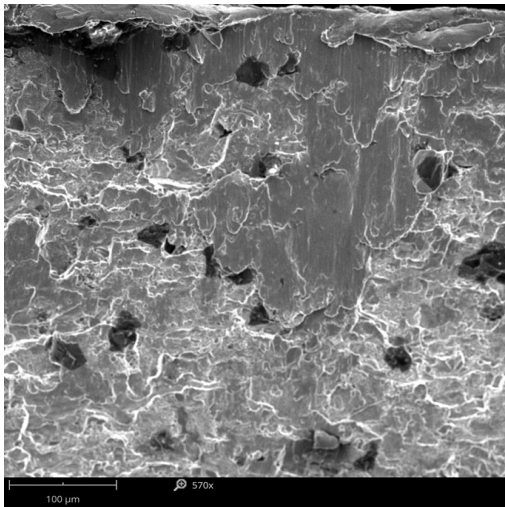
SEM micrograph showing the fracture surface morphology of lower sheet
